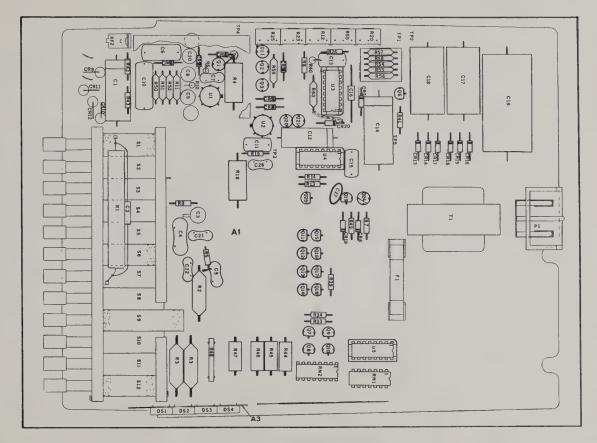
8000A MAIN PCB ASSEMBLY
